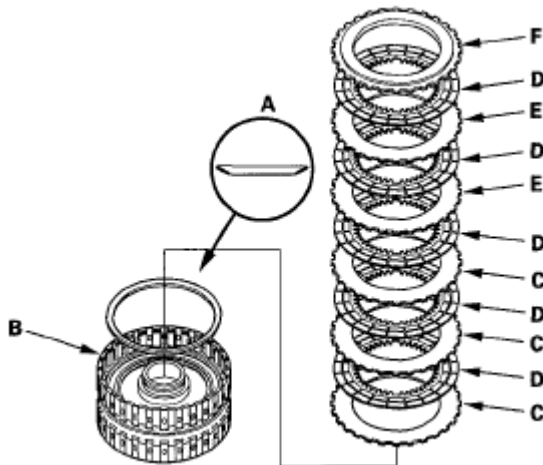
Identifying Disc Spring, 4th Clutch Drum, 4th Clutch Flat-Plate, Flat-Plates And Discs
